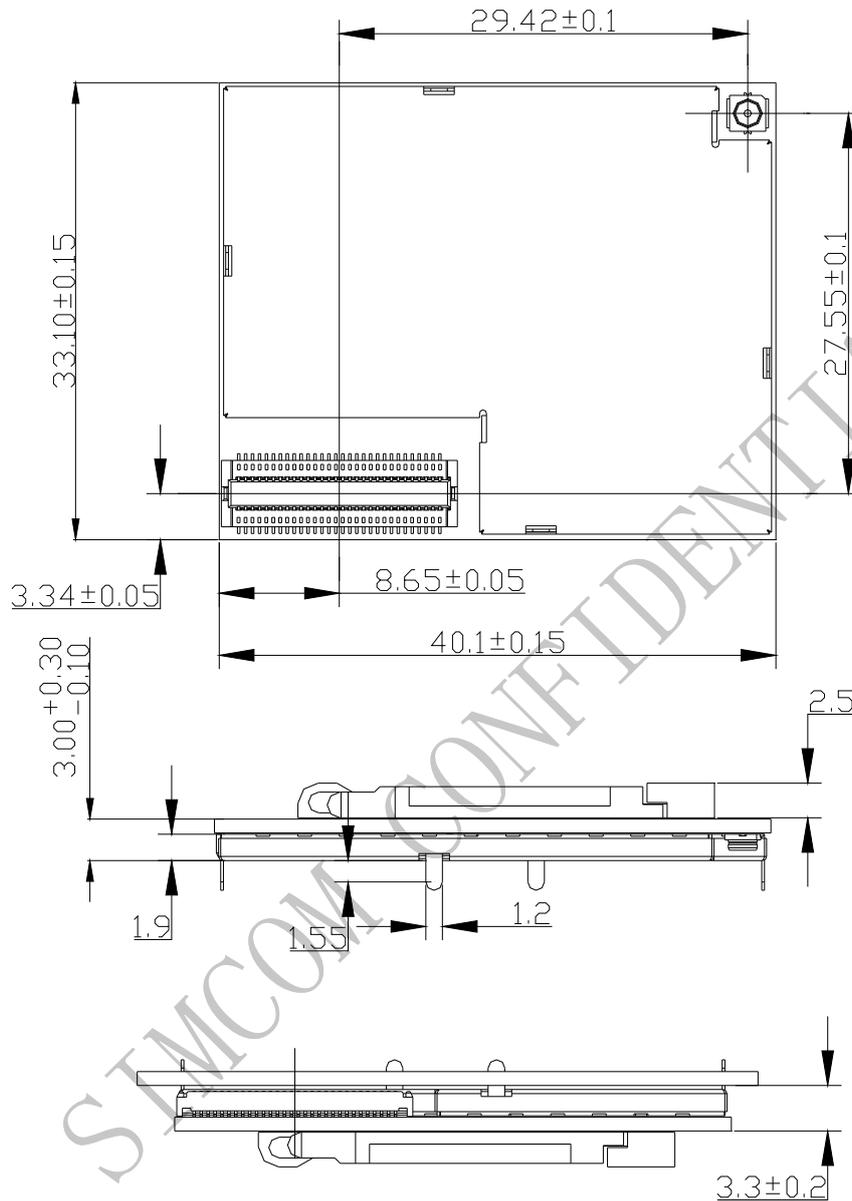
Top and Side Mechanical dimensions of module (Unit: mm)
